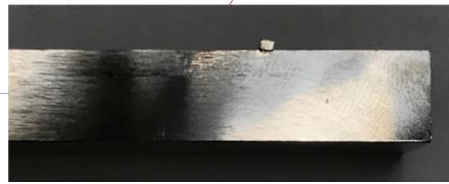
Optical micrographs – fracture location of shear test specimen (4)
